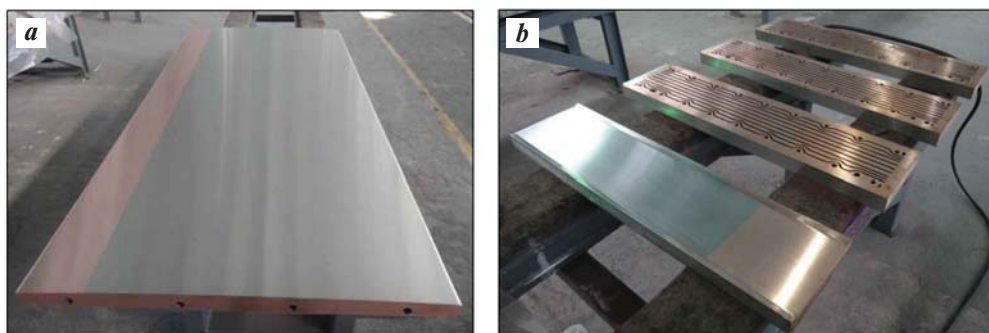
Slab CCM mold plates: wide (a) and narrow (b)
